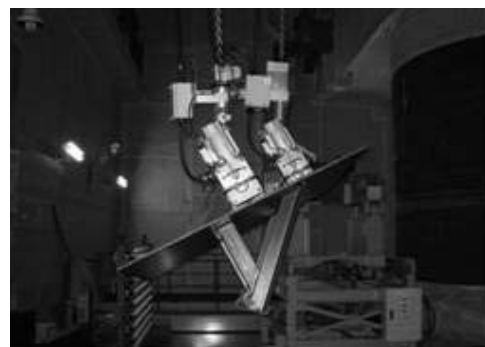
Remote grip and transfer device - Handling tests using test pieces
